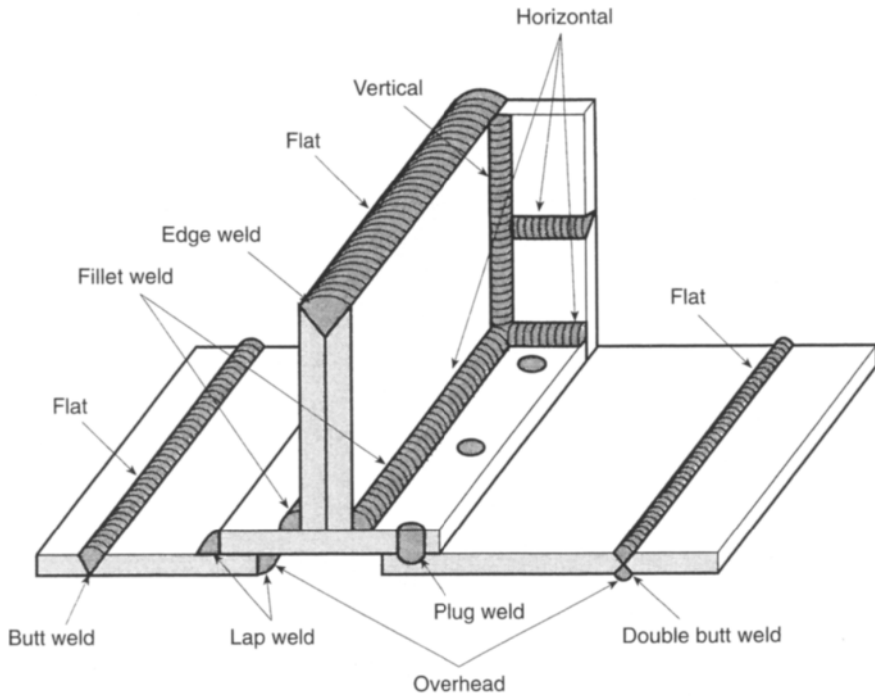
Typical geometries of welds produced by electric arc welding processes.
